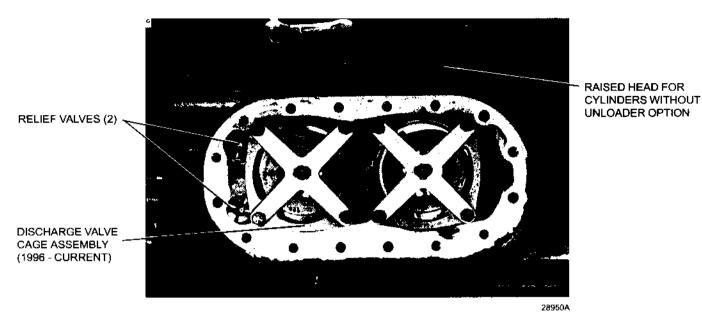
SUCTION AND DISCHARGE VALVES AND RELIEF VALVES
